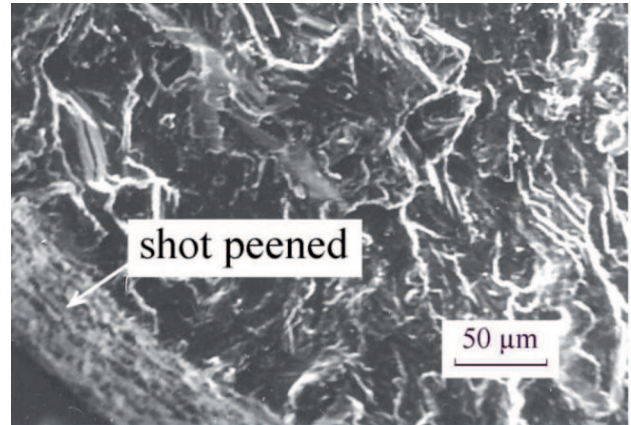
Fatigue fracture of the specimen with shot peened surface with thickness of approx. $50 \mu m$
